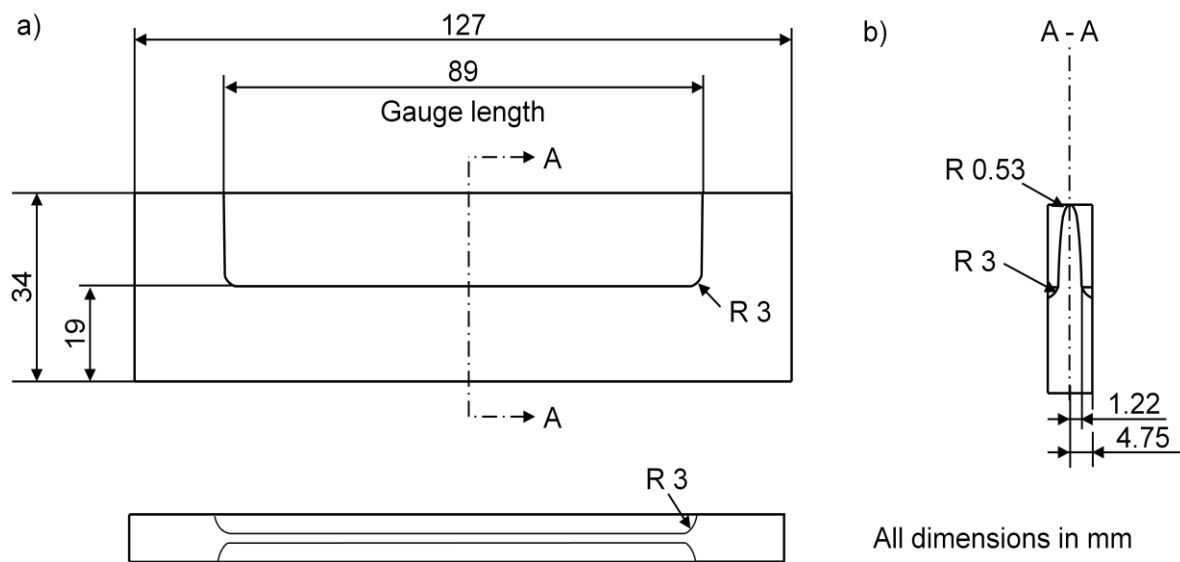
Showing a) the geometry of the four-point bend aerofoil specimen (dimensions in mm), and b) the cross sectional view of the aerofoil specimen.
